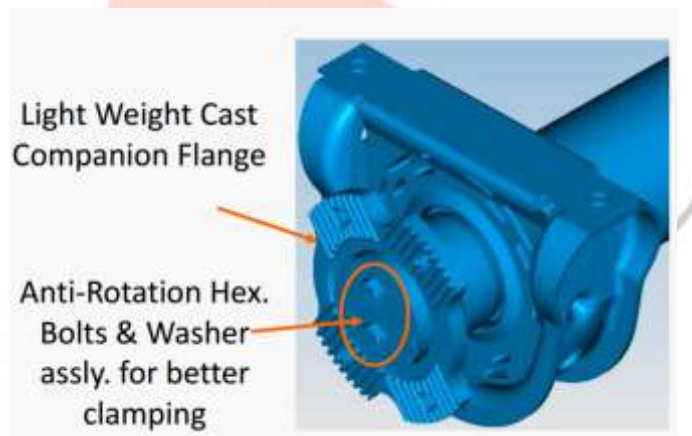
b: C 2040 Series Flange design of a companion Flange, [13]
